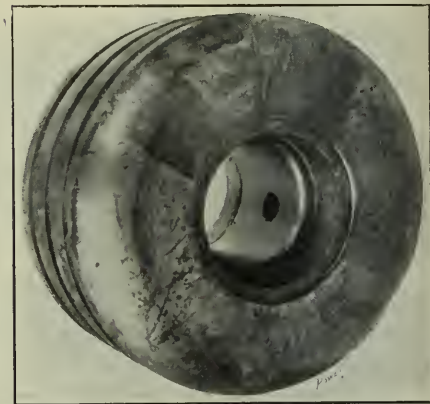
42-INCH ONE-PIECE GAS-ENGINE PISTON
